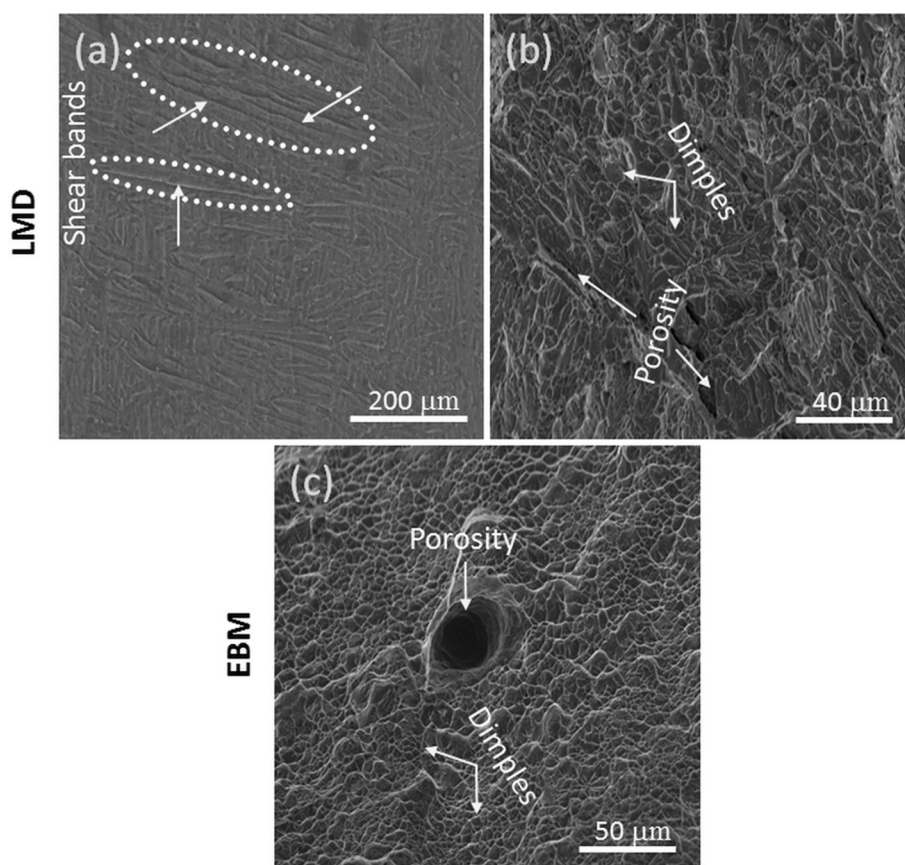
SEM micrographs of side surfaces of tensile tested (a) LMD specimen and fracture surfaces of (b) LMD and (c) EBM specimens of Ti6Al4V
